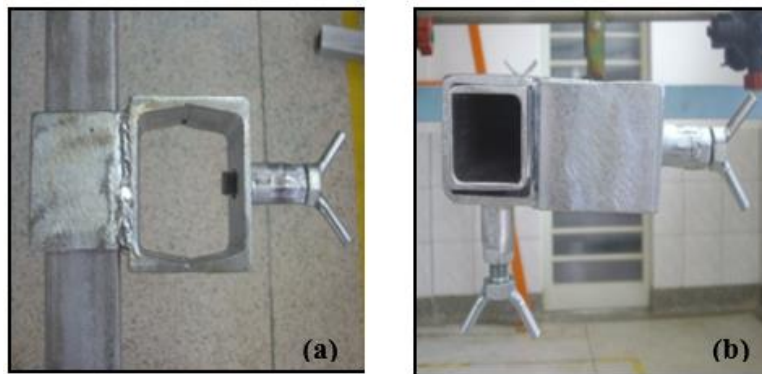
Detailed view of the brackets built by joining two U-beams with a nut and bolt (a and b) and the bracket connecting the vertical holder to the horizontal bar.
